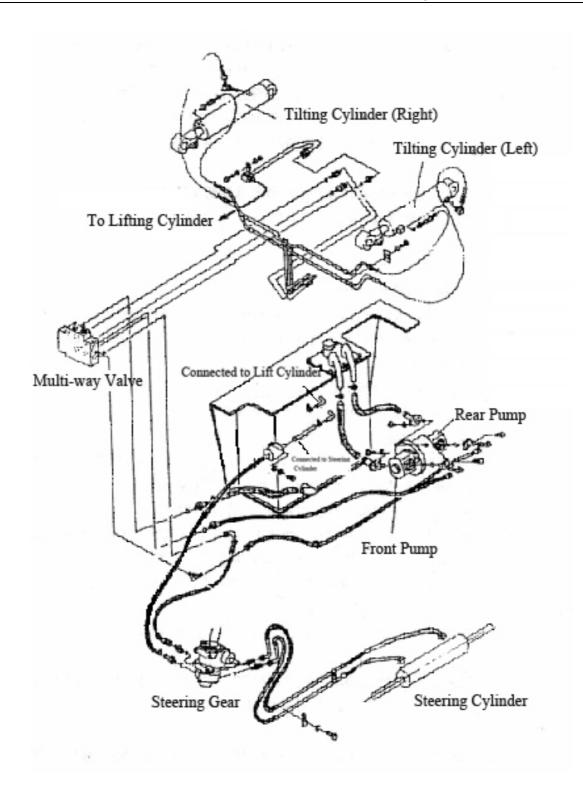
Drawing of Oil Circuit for Hydraulic System (5-10t)
